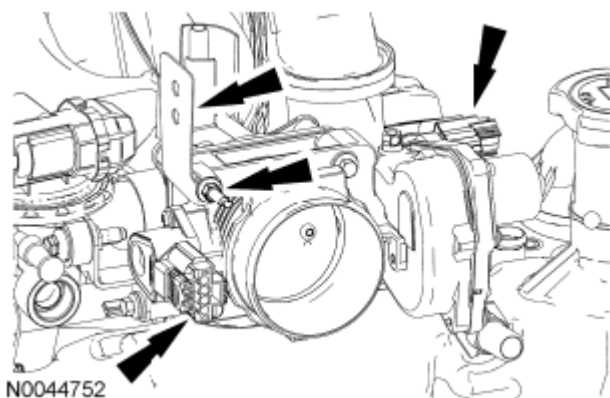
Locating Electronic Throttle Body And Throttle Position Sensor Electrical Connectors
